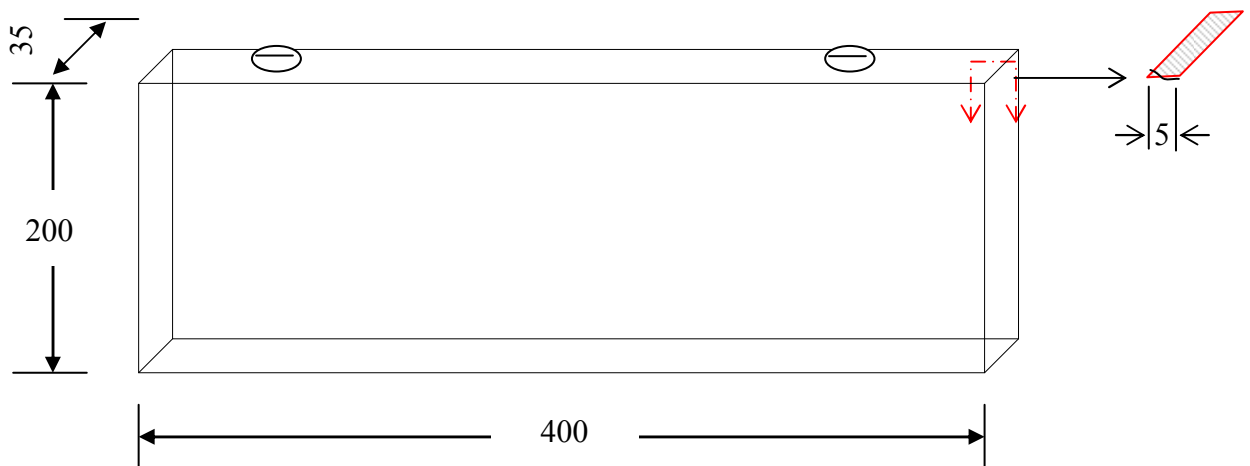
Geometric dimensions of a porous ceramic evaporator for hanging option (dimensions in mm)
